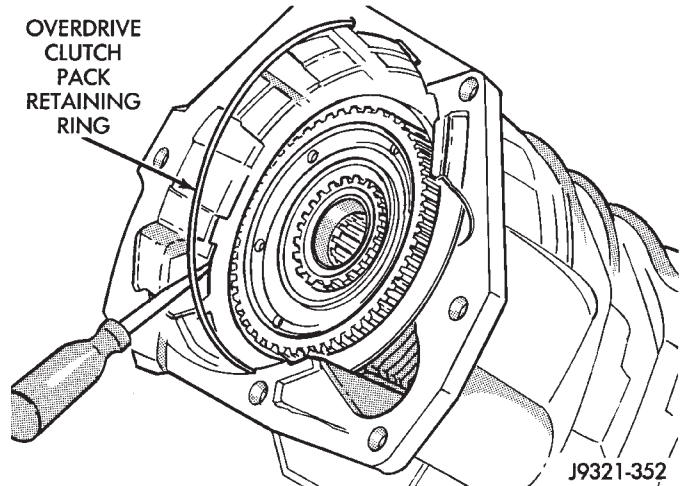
Removing Overdrive Clutch Pack Retaining Ring
